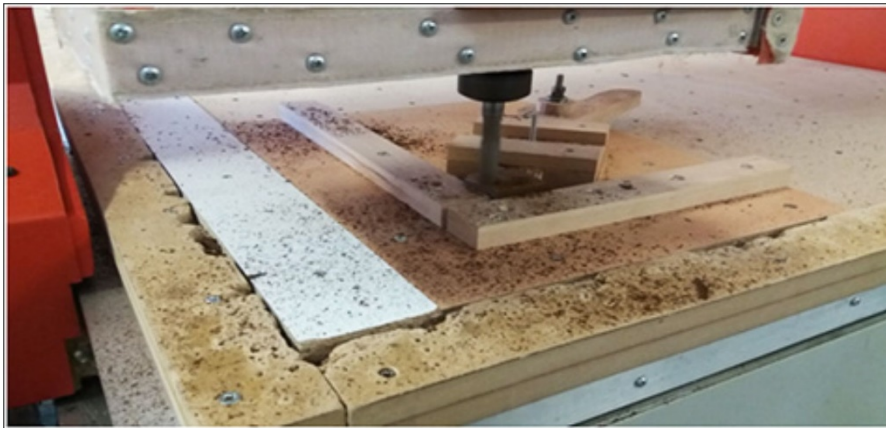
CNC machine (*BDARK 2120 PRO, Turkey*) in face milling operation
